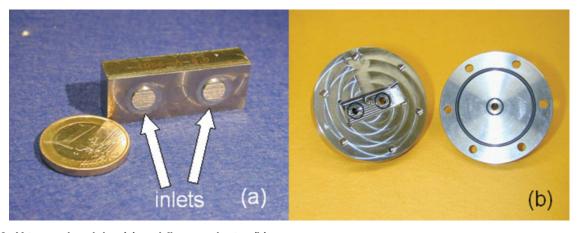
V-type mixer inlay (a) and flange adapter (b).
